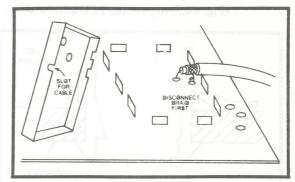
Coaxial cable replacement procedure. Disconnect the shield first to release the cable. Solder the center conductor first upon installation. Do not overheat the PC foil or cable.
